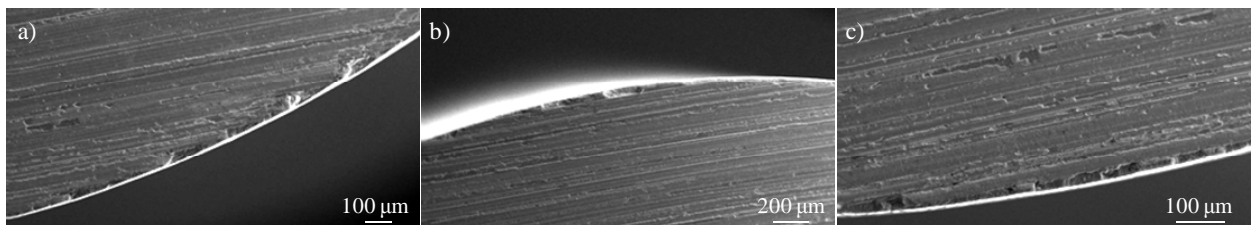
Fractography of the UNIVERSAL punch coated with W:C-H; rake face after 5000 strokes
